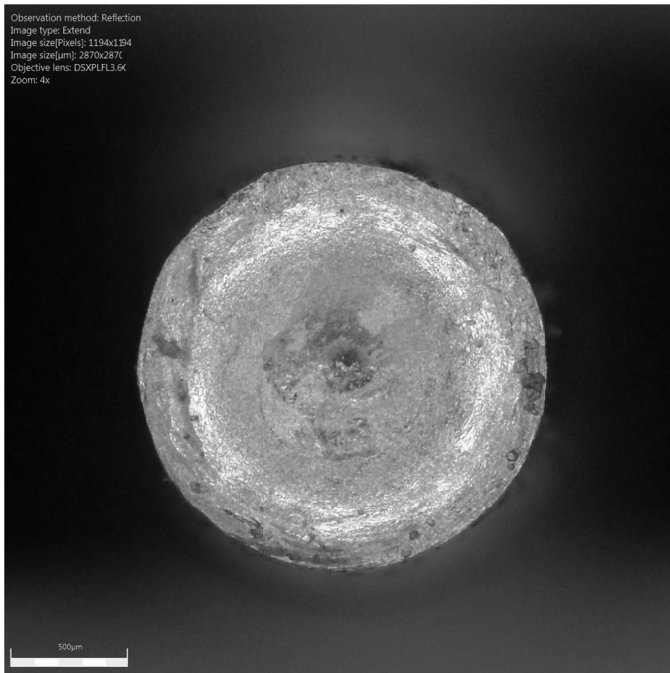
A fracture of final  $\phi 1.7$  mm-diameter wire drawn at a drawing speed of  $v = 10$  m/s in a torsion test; characteristic surface of a smooth fracture
